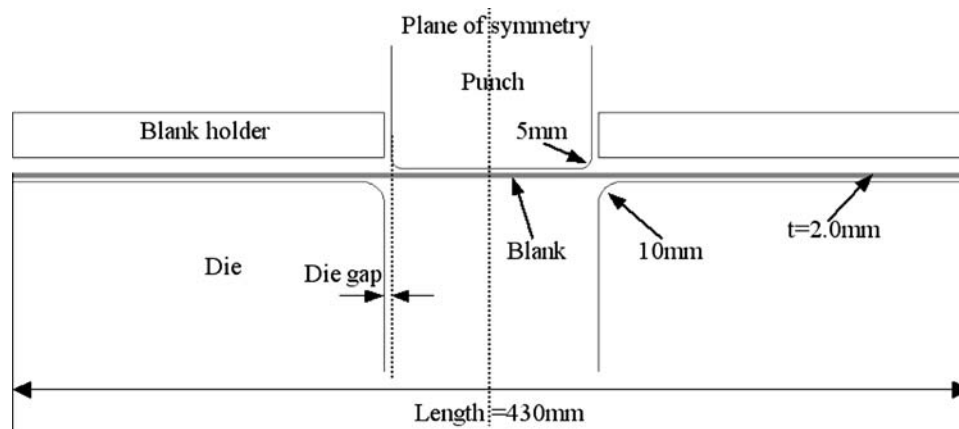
Schematic illustration of tools and blank used within hot-stamping process
